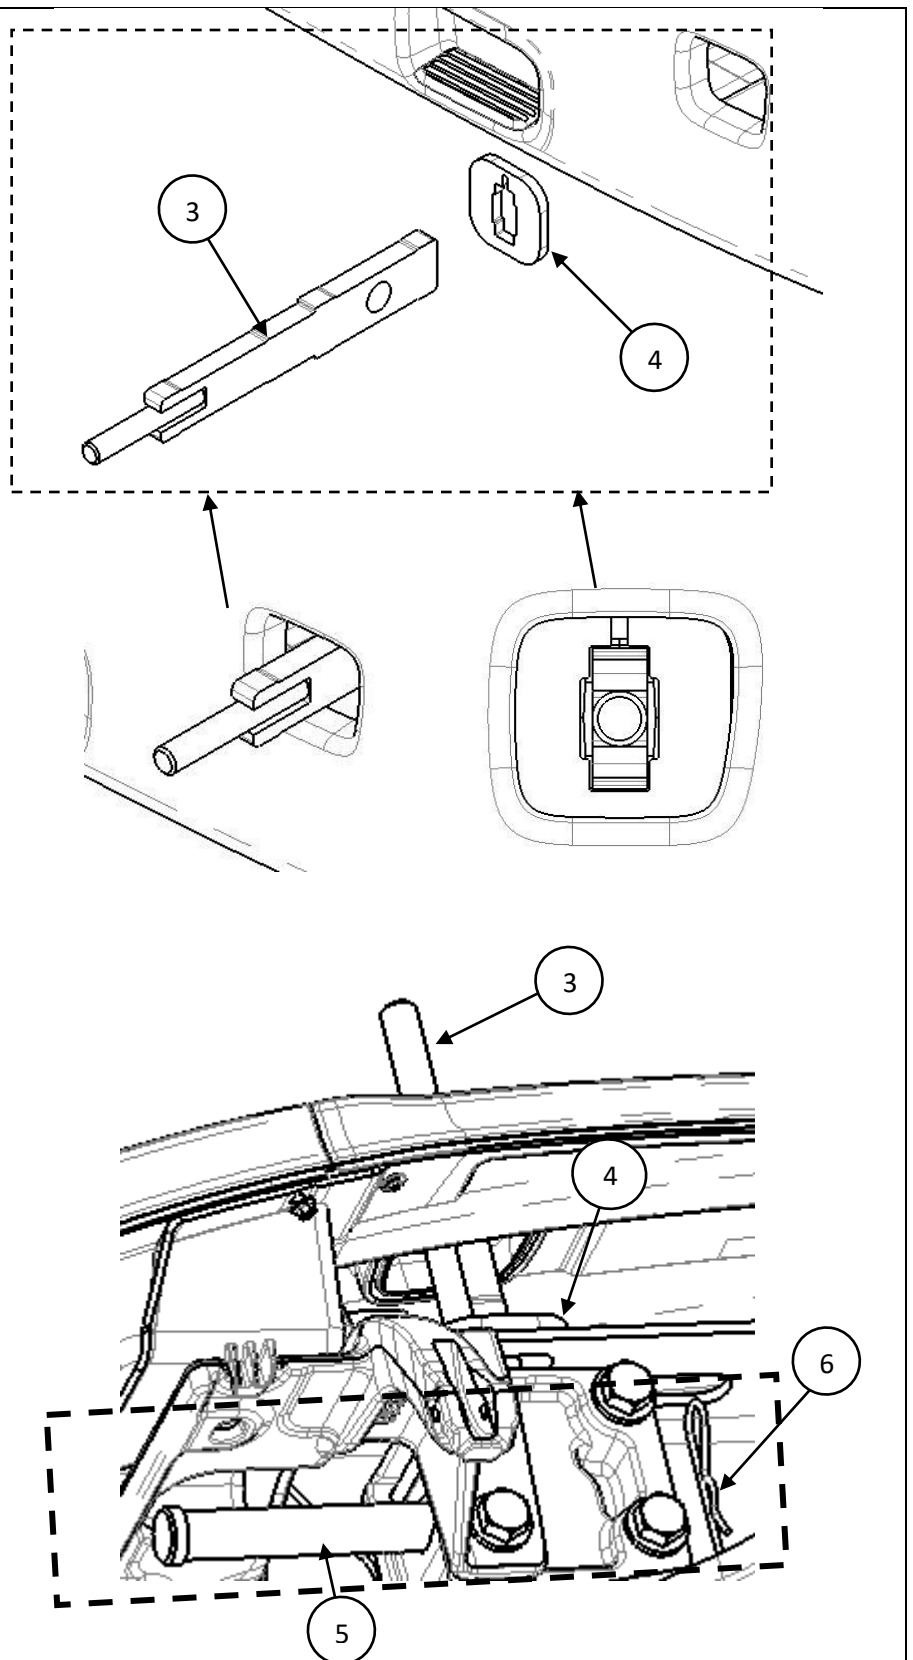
Tow mount installation (Top view inside driver's side fender, hood not shown).
